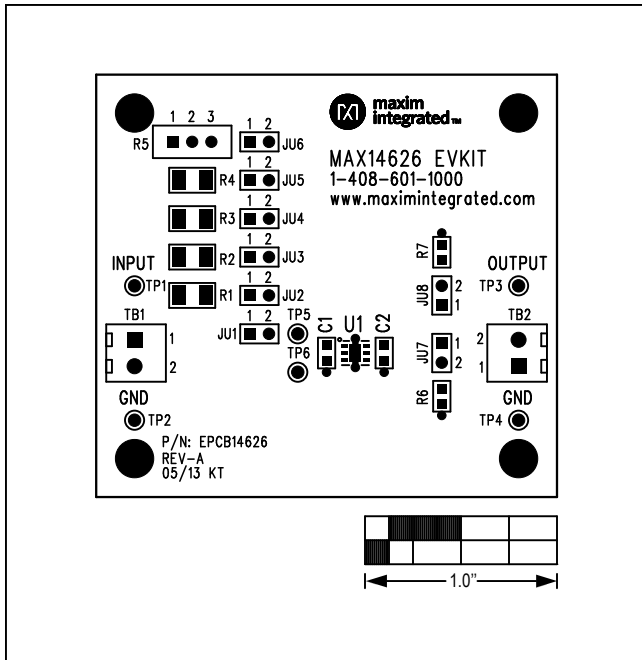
MAX14626 EV Kit Component Placement Guide—Component Side
